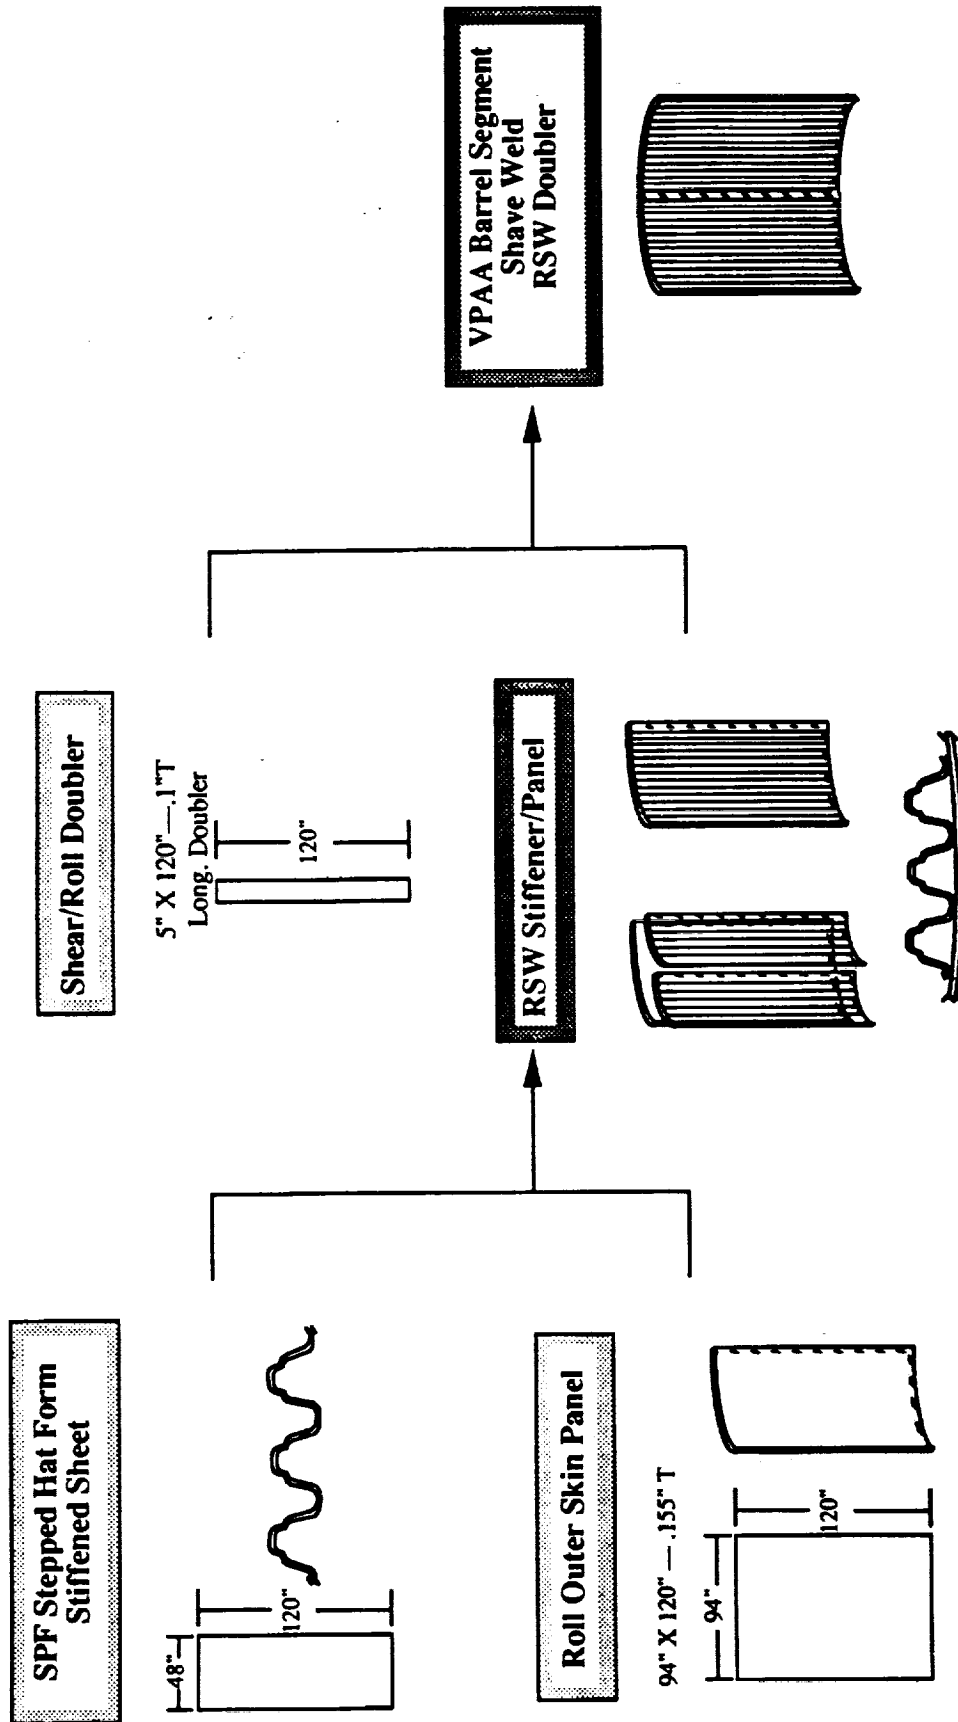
Manufacturing Process Flow for 2090 Al-Li SPF Stiffener Panel Fabrication and Assembly Into Barrel Sections.
